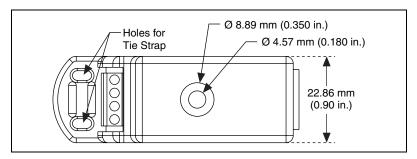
NI 9944/9945 Dimensions and Hole Clearance
